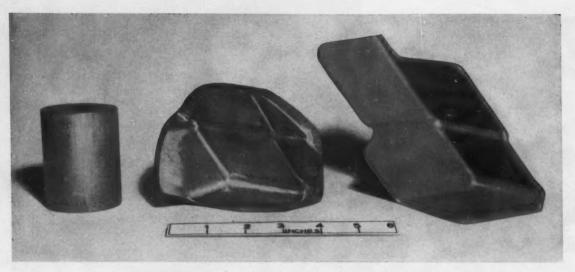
Aluminum-alloy gastight corner component for aircraft application, forged to finished dimensions, thus eliminating the necessity for machining.
